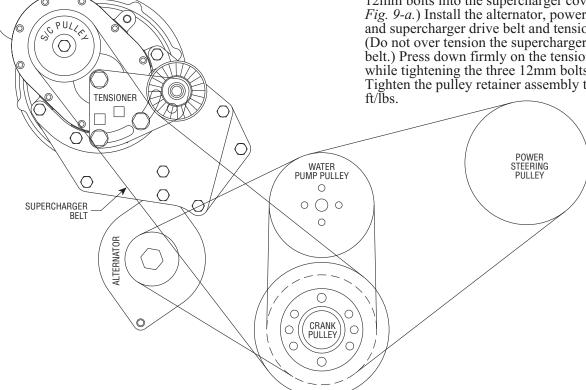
a / Passenger Side Supercharger Belt Routing (Driver Side Similar)
